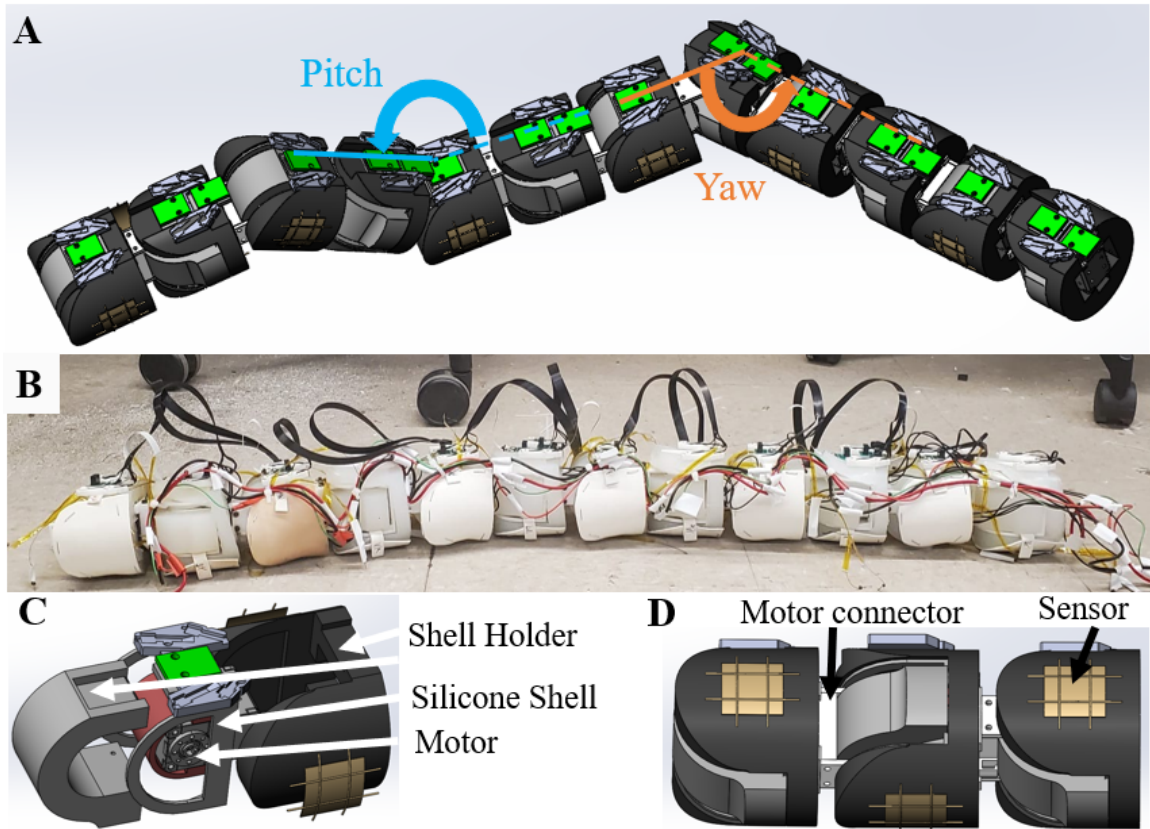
SenSnake v1. (A) CAD showing 3-D bending with pitch and yaw degrees of freedom. (B) Photo of robot without sleeve. (C) Exploded view of a segment. (D) Side view CAD of three segments with sensors on the side of yaw and bottom of pitch segments.
